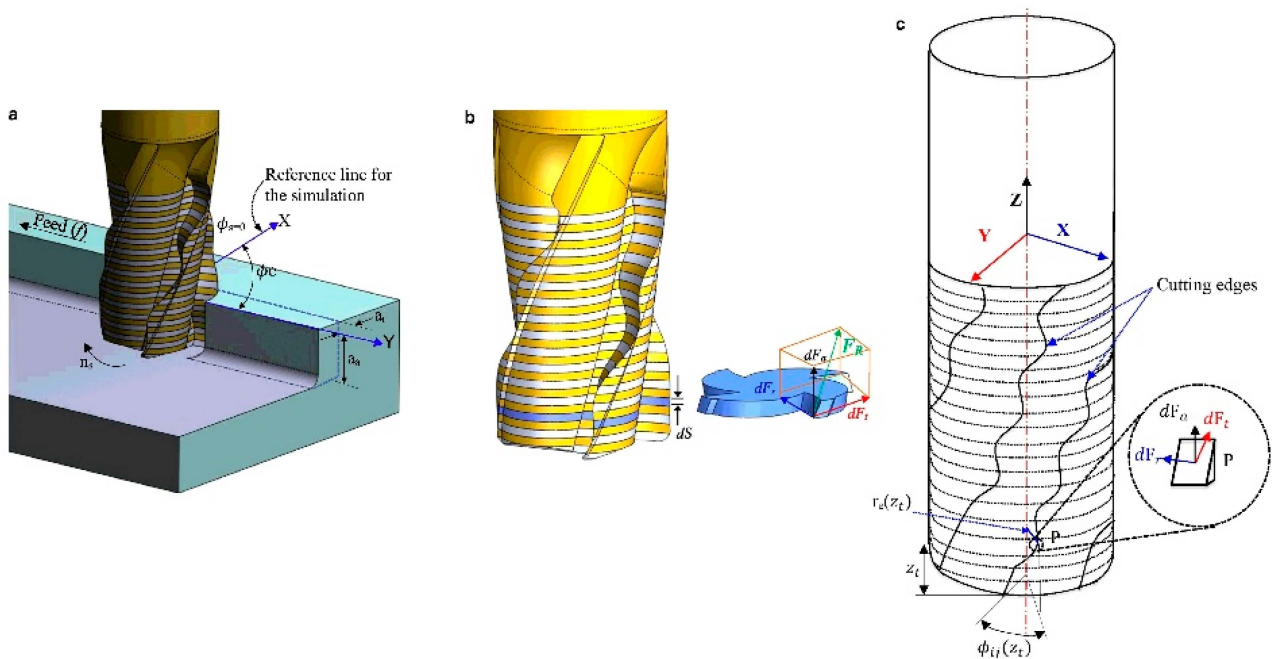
(a) The WEBNHE partially immersed radially during up-milling; (b) the axial segmentation of the end mill and the various  $F_t$ ,  $F_r$ , and axial cutting force ( $F_a$ ) components experienced at the cutting edge of a representative disk; (c) the distinct  $F_t$ ,  $F_r$ , and  $F_a$  [142].
